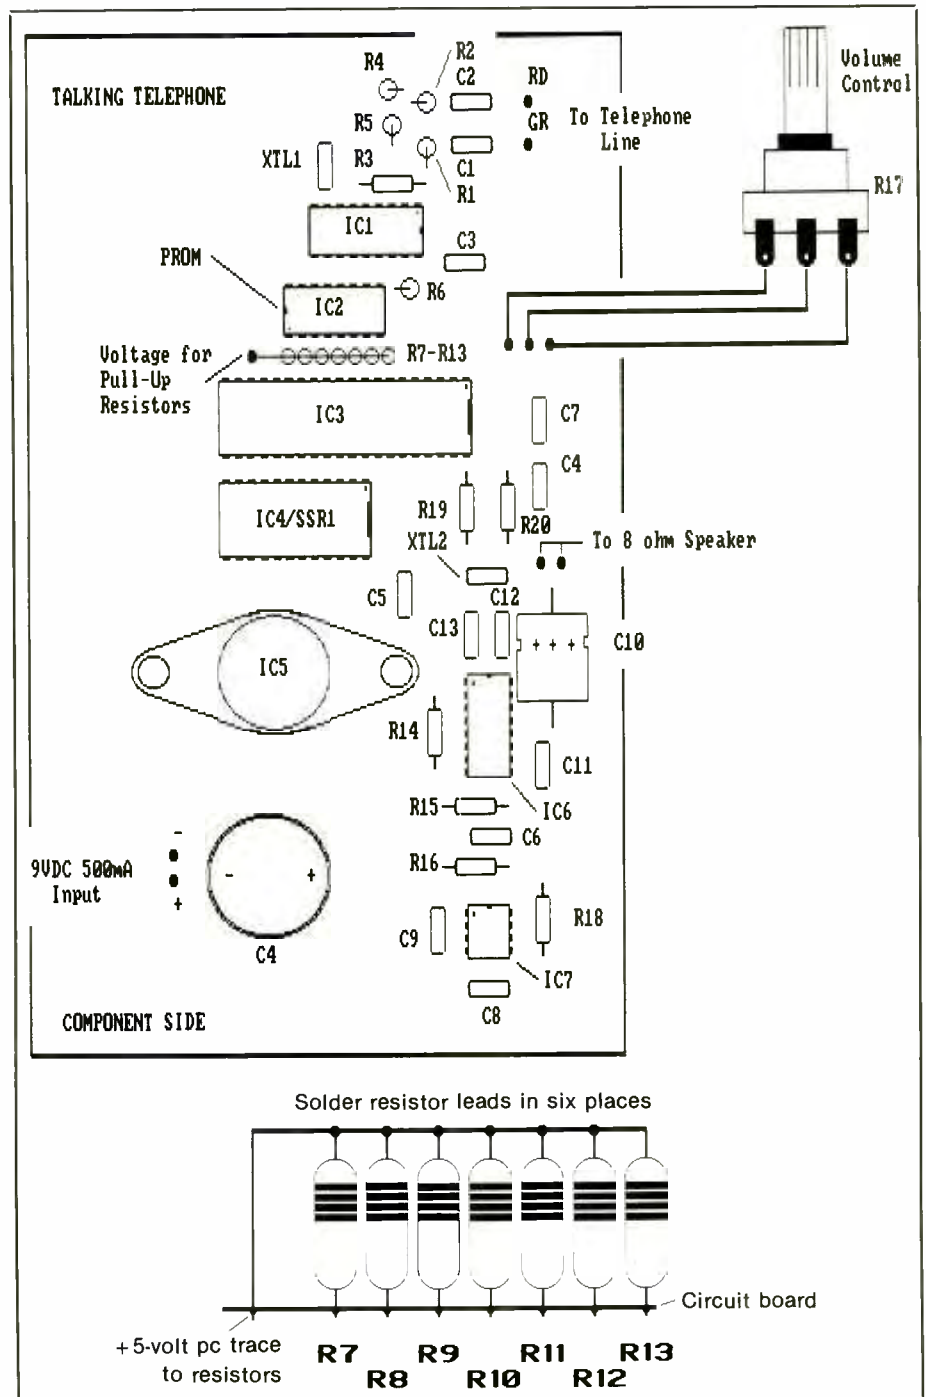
Wiring diagram for printed-circuit board, with detail for mounting resistors on-end.
